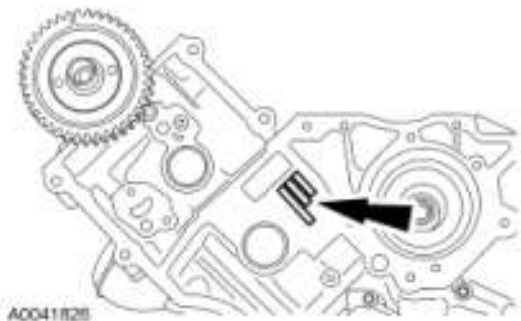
Identifying Main Bearing Code Found On Front Of Engine Block
